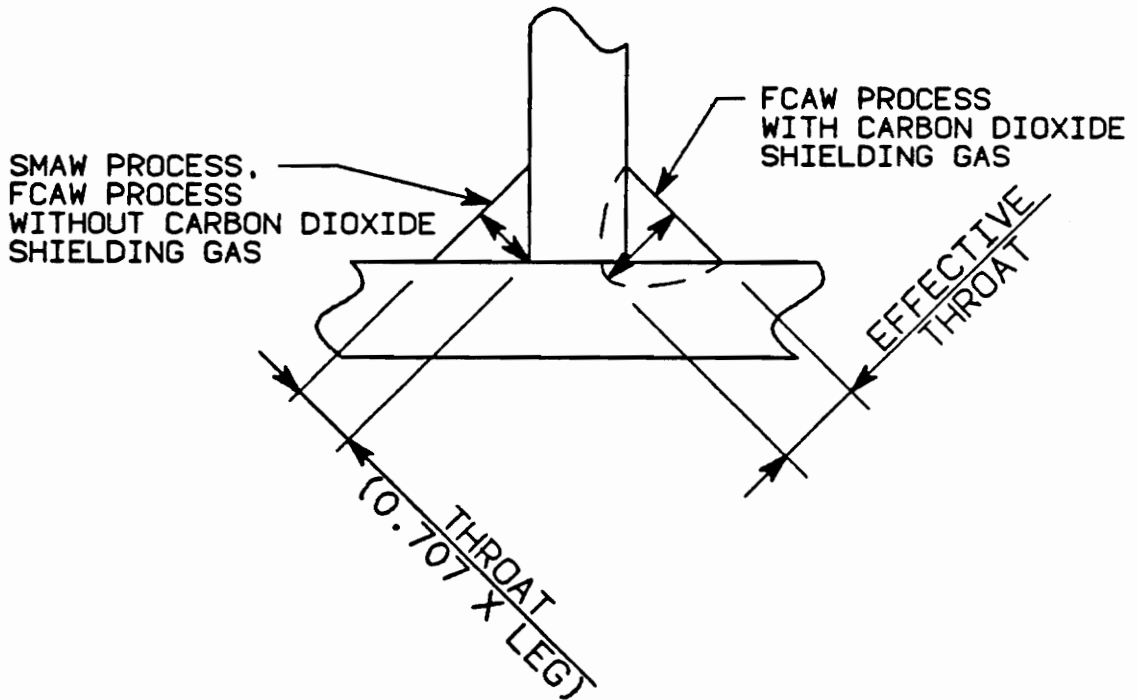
Diagram Showing Increased Penetration of FCAW with CO₂ for Fillet Welds.
